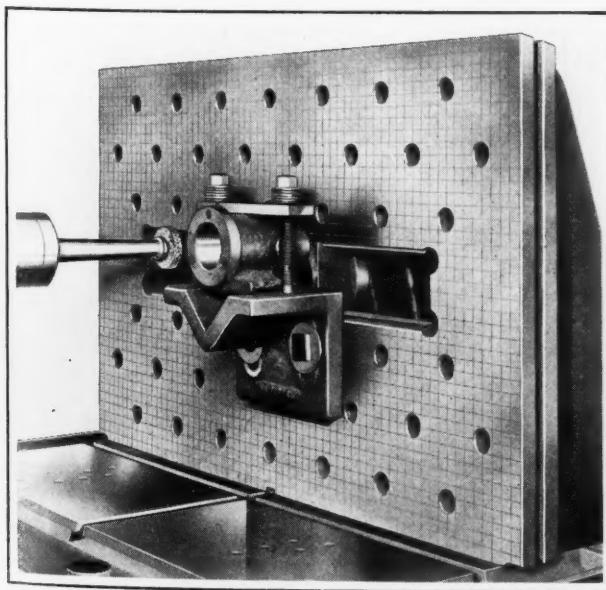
A Bell-ringer Cylinder Set up Ready for Grinding
